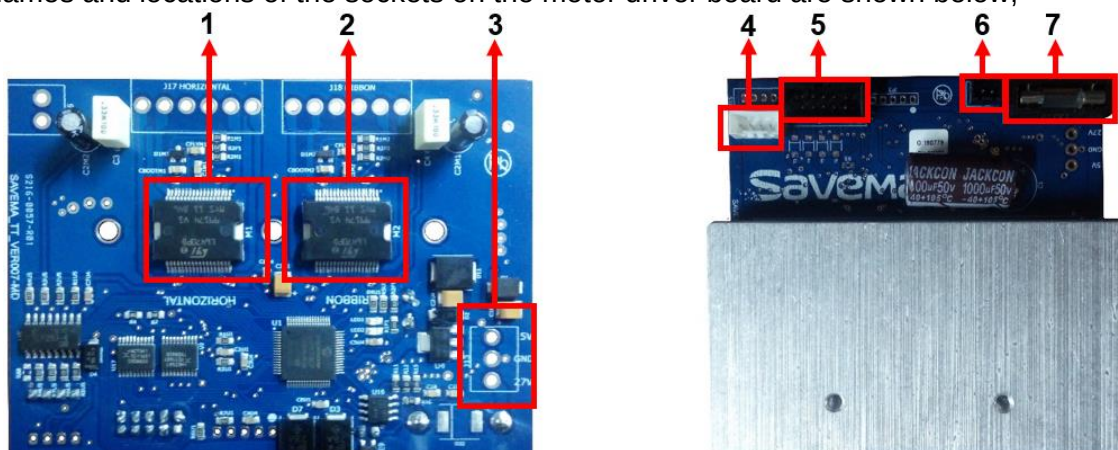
Connectors in Motor Driver Board (Left→Back Side, Right→ Front Side)
